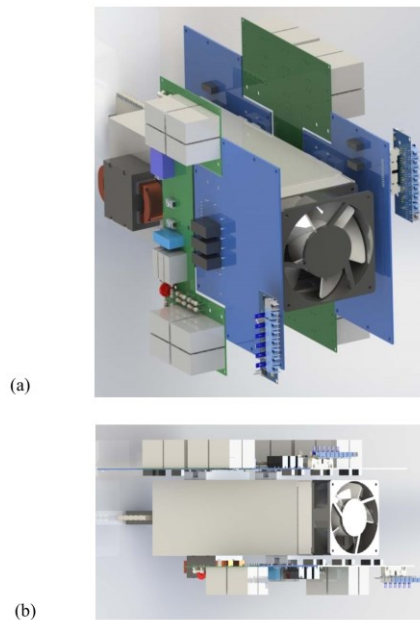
3D drawing of the converter cell prototype. (a) Side view (b) Upper view. Length: 485 mm; Width: 337 mm; Height: 245 mm.
